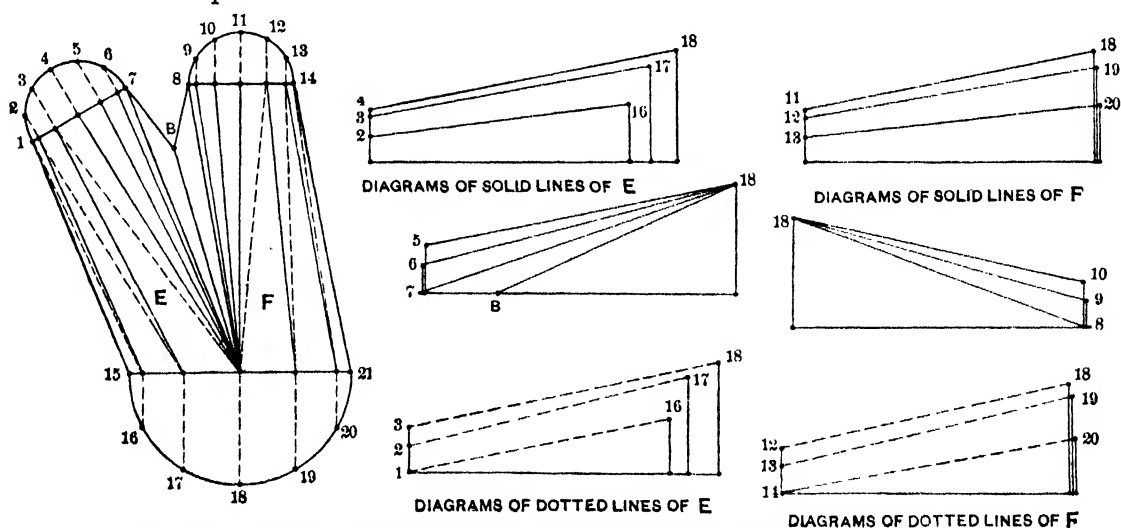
Elevation, Profiles and Diagrams in Obtaining Pattern for Pipe Branch
